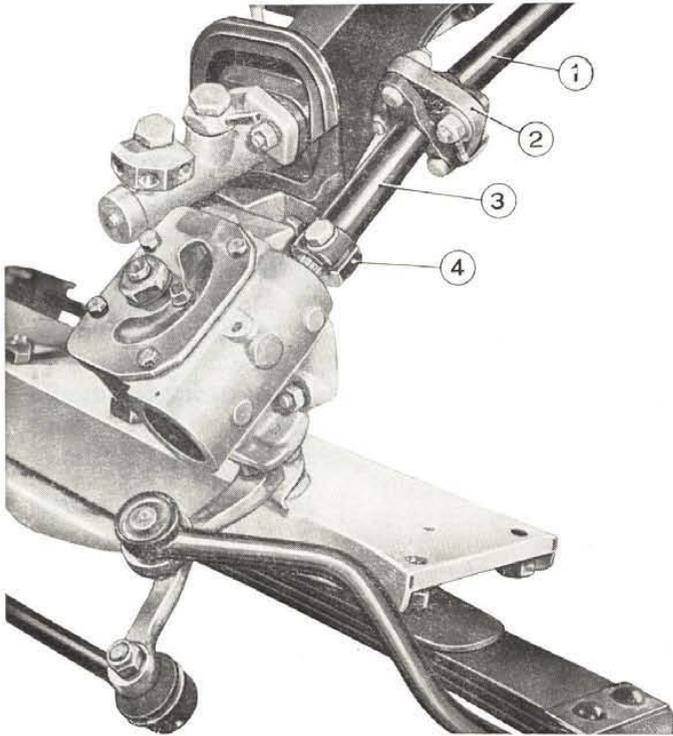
Scrap view of the steering system showing the column flexible joint.
